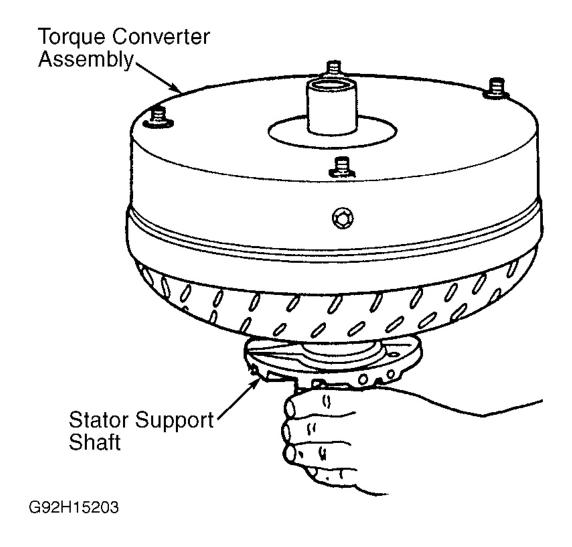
Checking For Stator-To-Impeller Interference Courtesy of FORD MOTOR CO.
